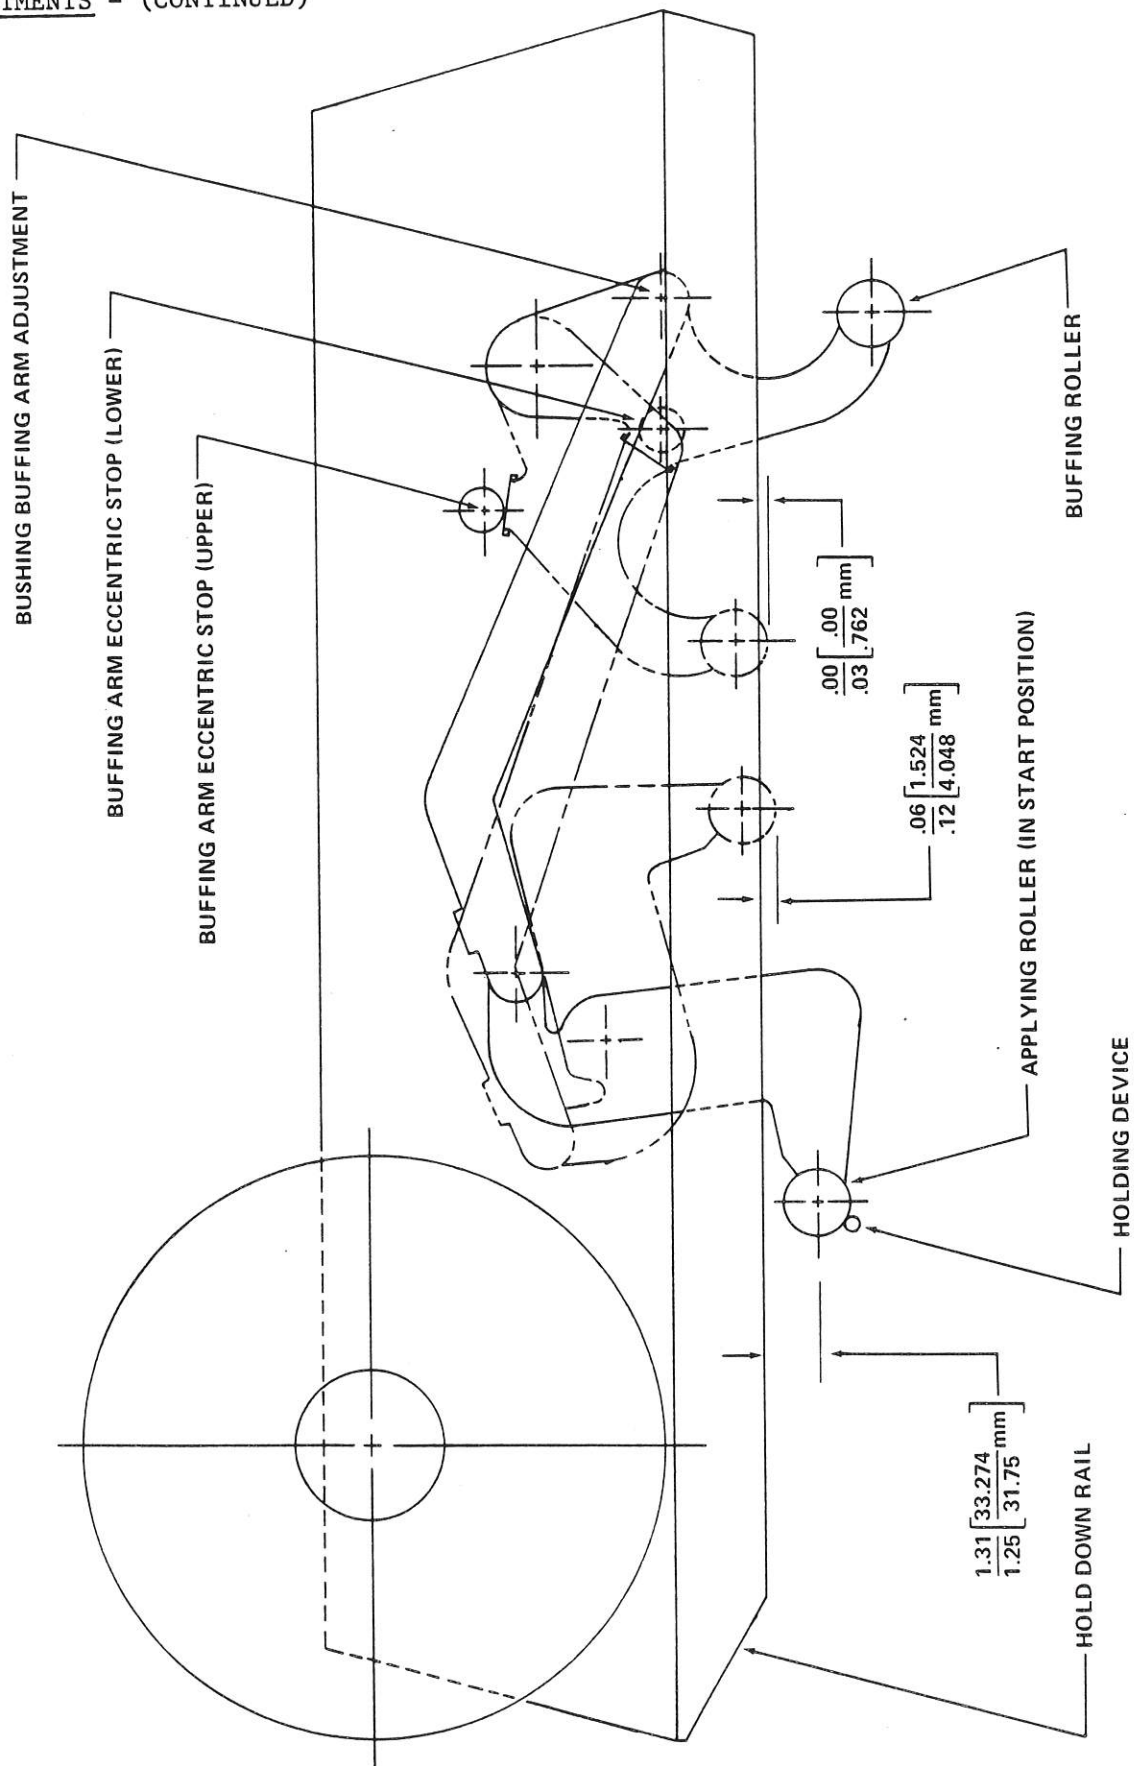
APPLYING ROLLER AND BUFFING ROLLER STOP POINTS.
